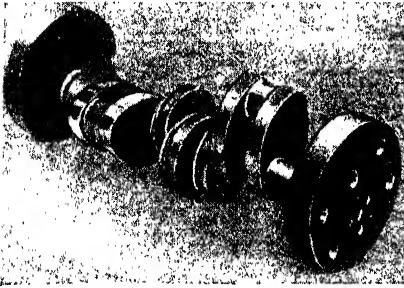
An Oval-web Crank Axle with Eccentrics out of Solid Bar.
